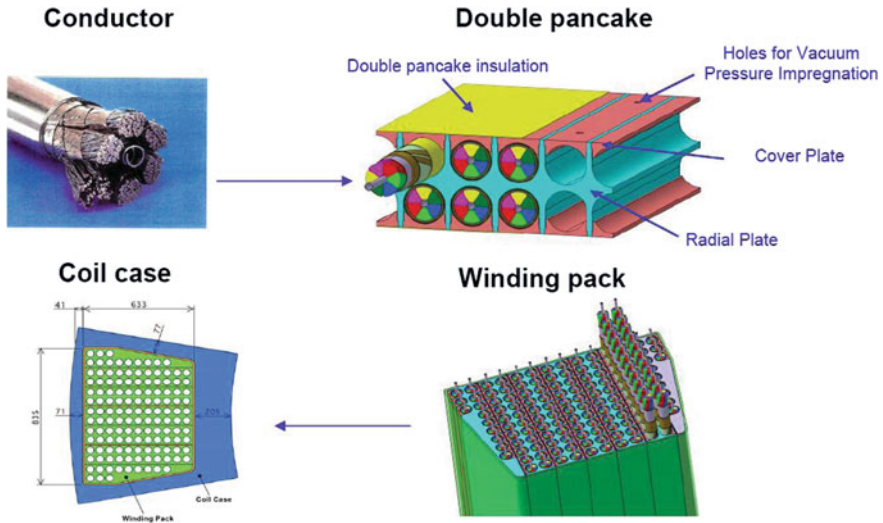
The ITER TF conductor is laid into the grooves, insulated, assembled into a winding pack, then welded into the coil case. Dimensions are mm. Courtesy of ITER Organization
